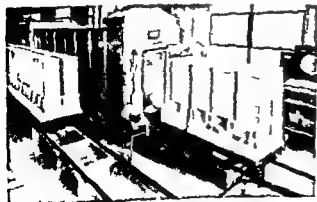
View of a medium-sized tunnel kiln used to fire feed ceramic floor tile (Swidell Dressler Inc)
